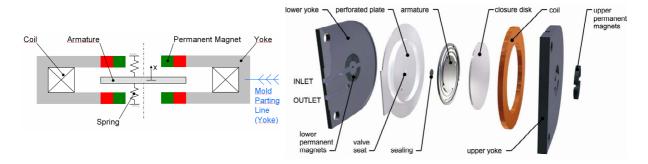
Magnetic circuit (left) and exploded view (right) of the micro valve.
